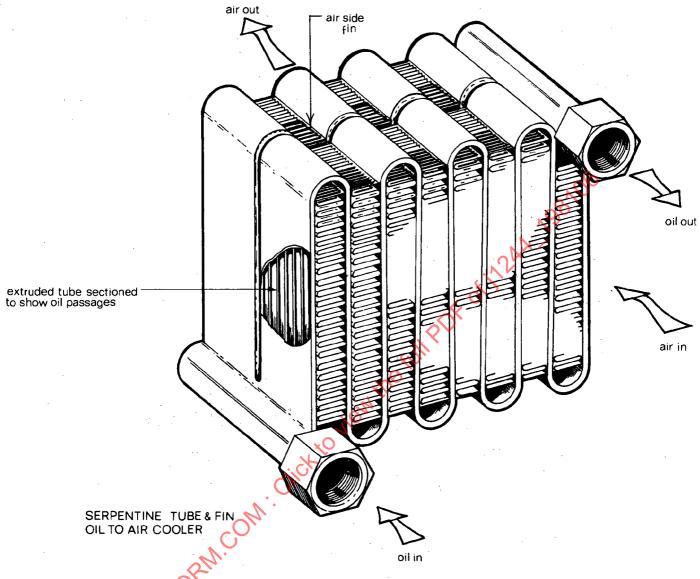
SERPENTINE TUBE AND FIN OIL TO AIR COOLER
